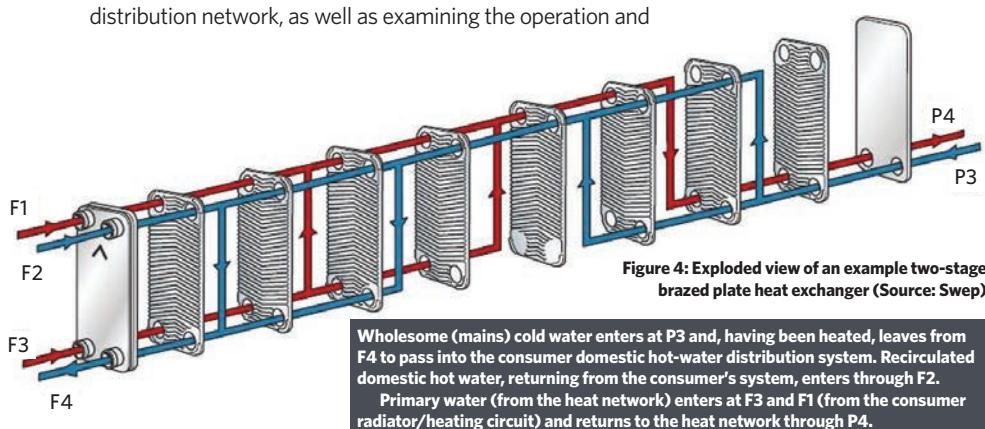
Exploded view of an example two-stage brazed plate heat exchanger (Source: Swep)
